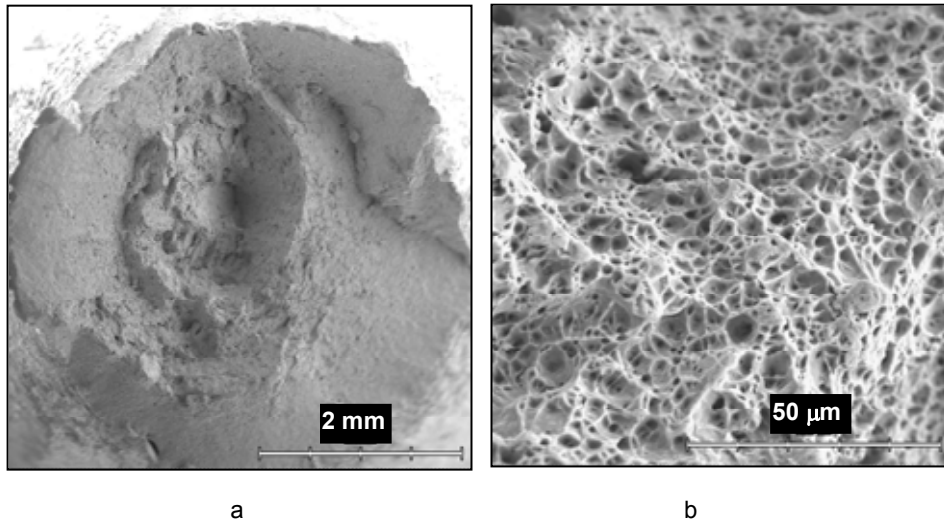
Fracture surface of the tube weld joint crept at 525°C/240 MPa/3 772 hrs: a) general view, b) detail of the central part. Specimen 2C1, SEM micrographs.
